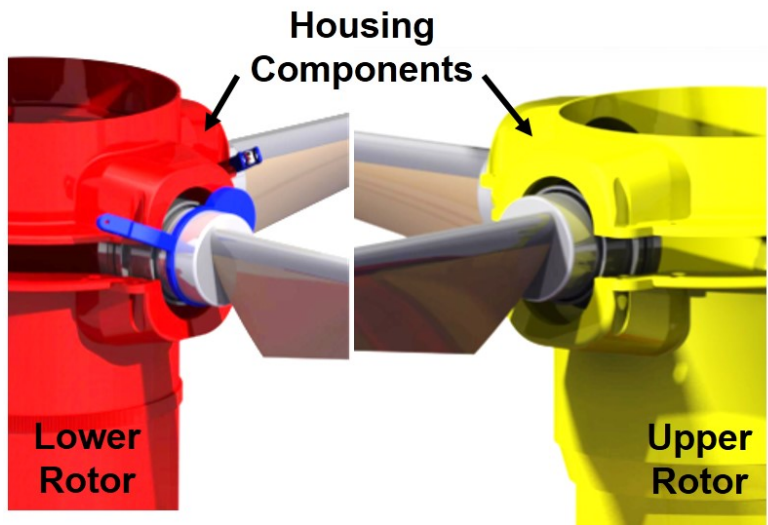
Bearing housing components clamp rotor blades to hub
